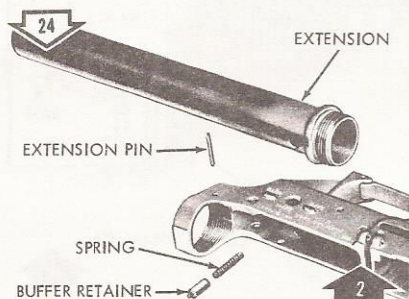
Disassembly/Assembly of Lower Receiver Group (Page 4 of 5)
